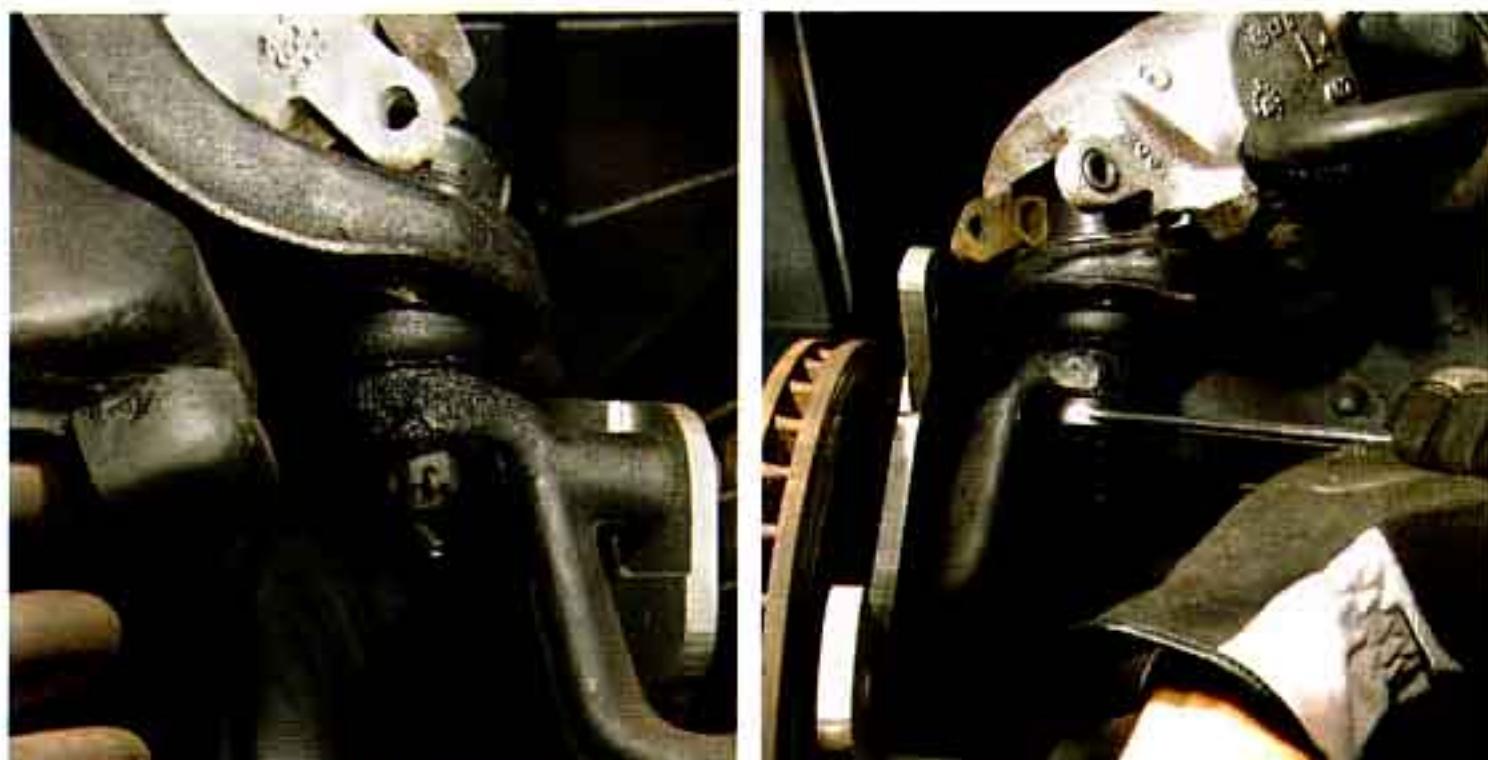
If the car has a front sway bar remove the outer sway bar end links.
